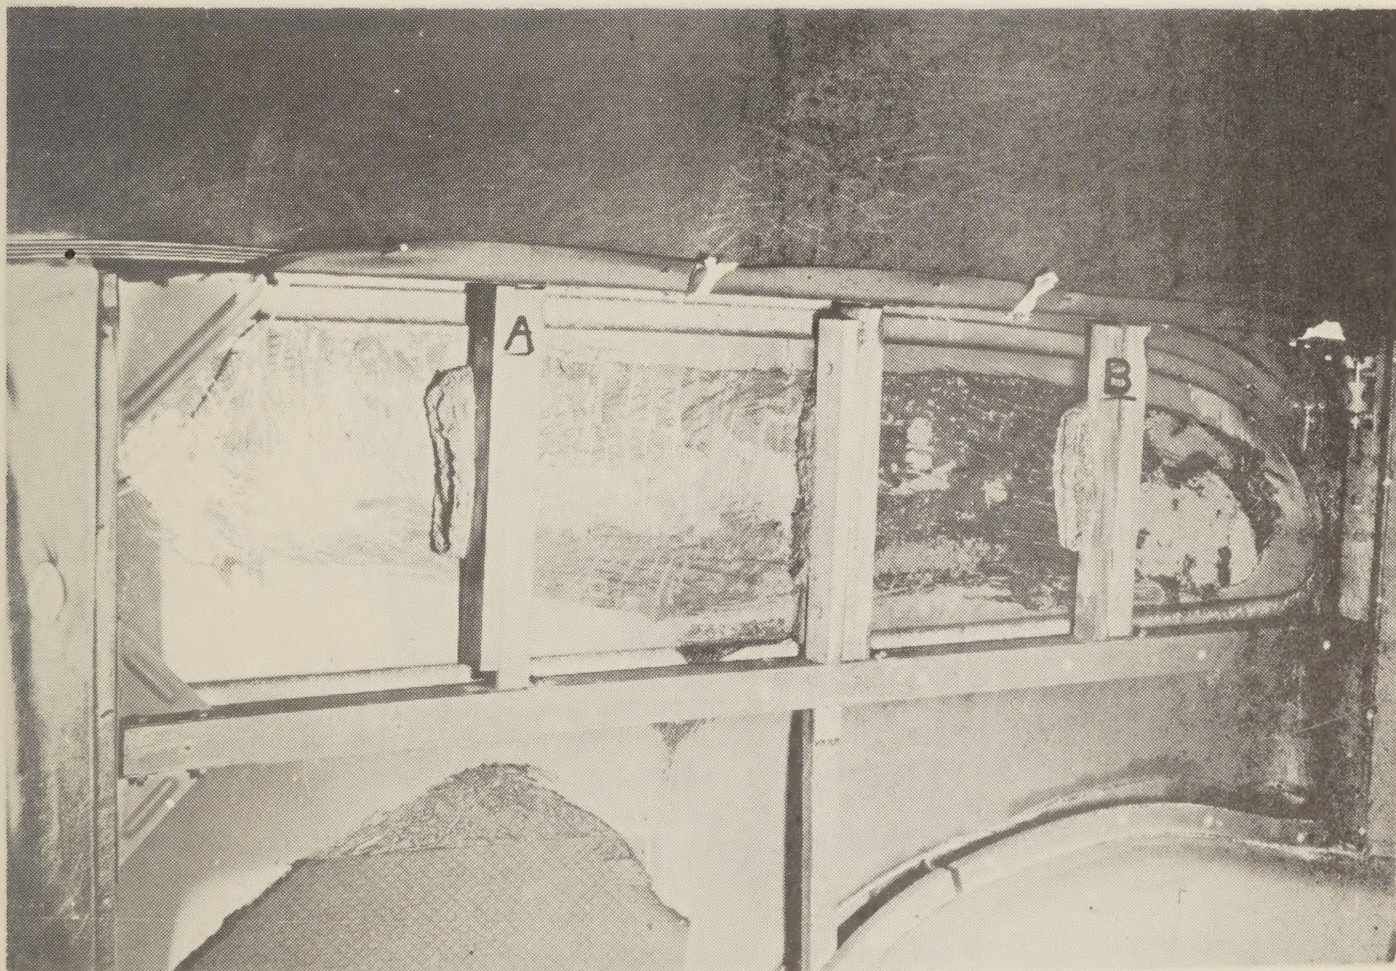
Interior view of truck showing fiberboard removed, exposing side wall bracing. Struts A and B are removed to permit window installation.
